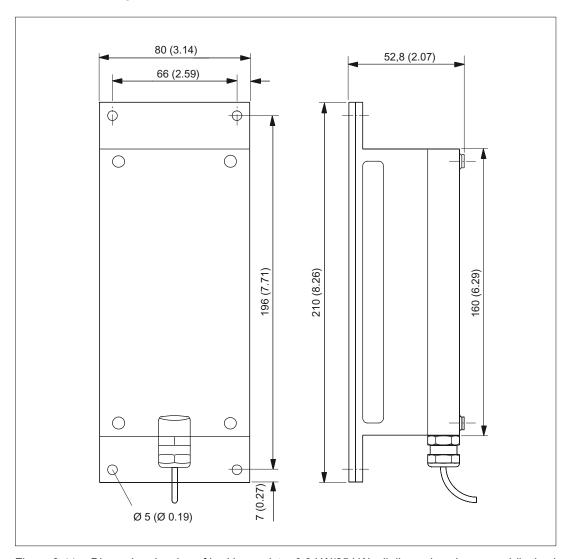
Dimension drawing of braking resistor 0.3 kW/25 kW, all dimensions in mm and (inches)
